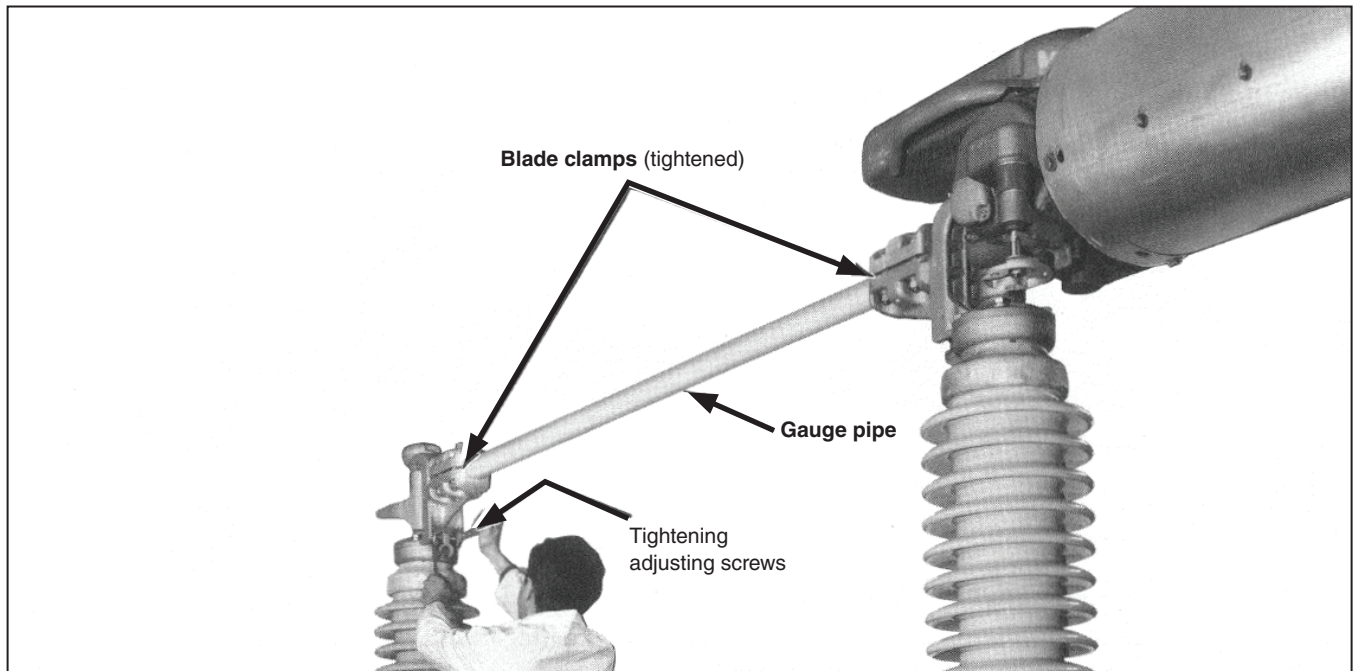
Blade-hinge alignment (1600 ampere rating shown.)
